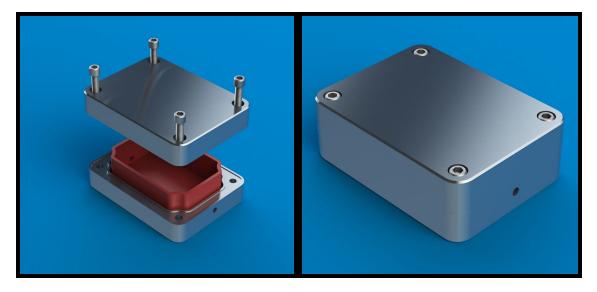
Prototype casing and inner carriage of the pneumatic tube sensor.
